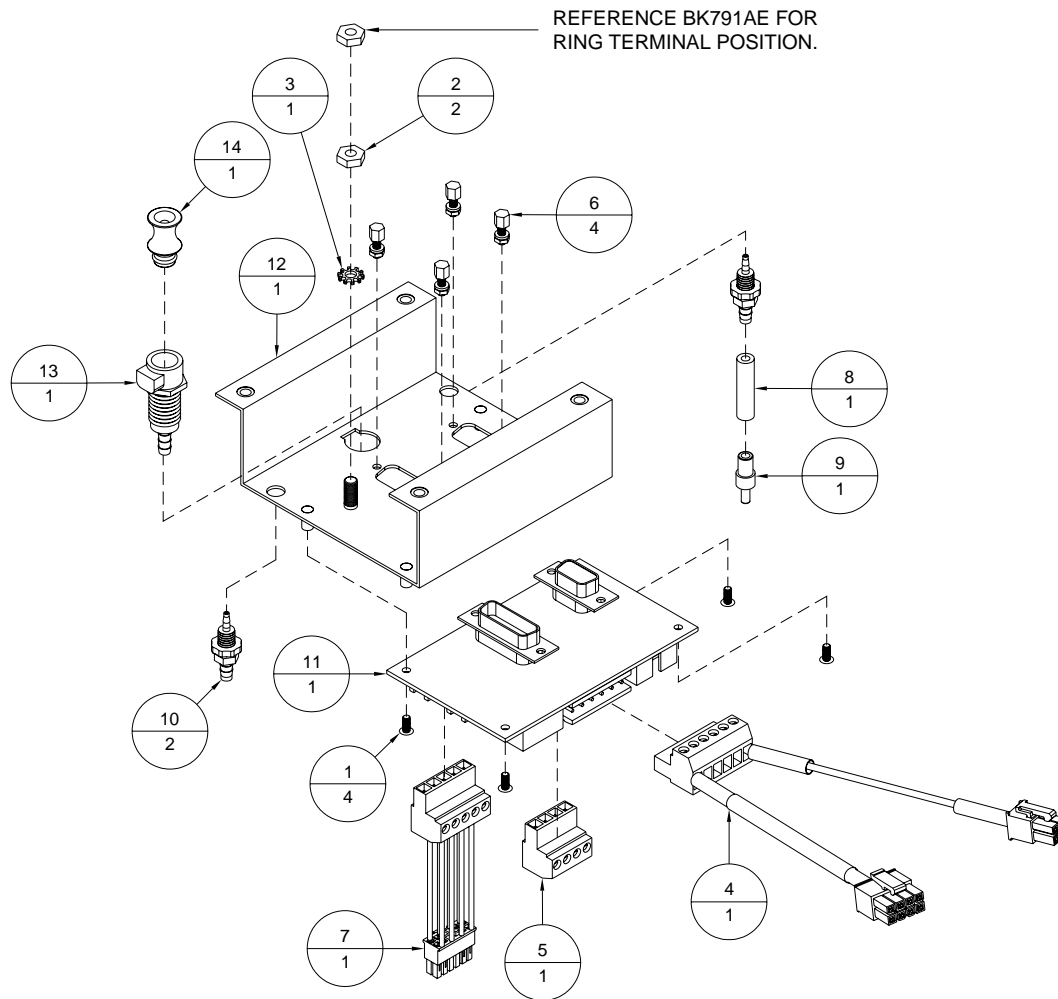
Port Bracket Assembly, Singlehead (9102109A)
